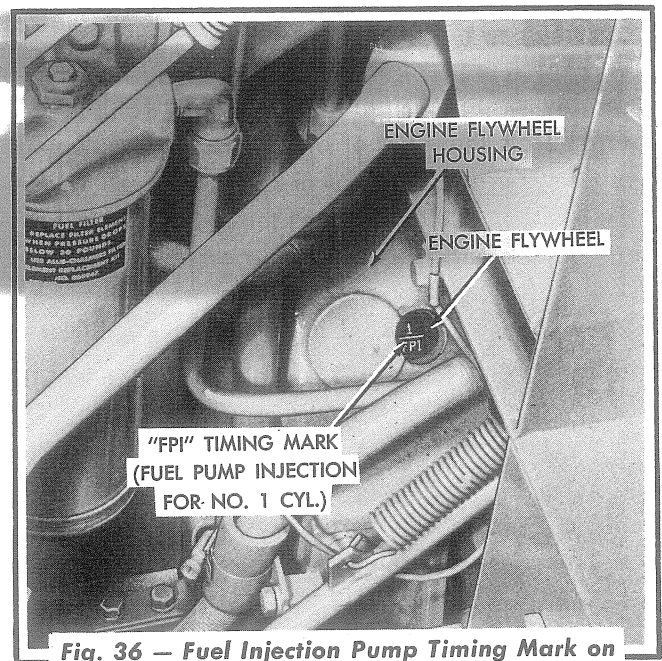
Fuel Injection Pump Timing Mark on Engine Flywheel (Effective with Engine Serial No. 67395)
